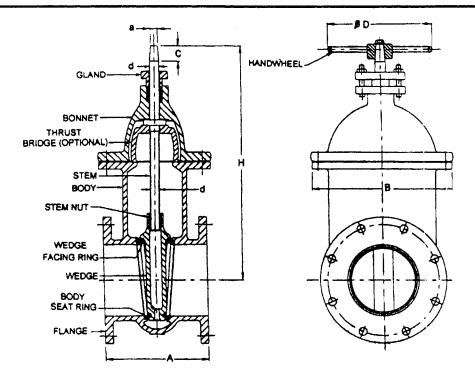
A TYPICAL SKETCH OF A SLUICE VALVE FOR SIZE 150 mm & WITH THRUST PLATE
